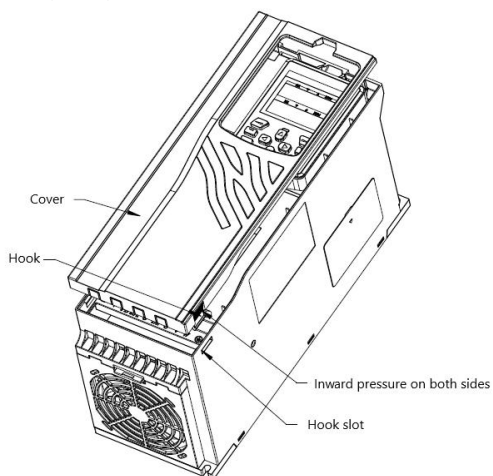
Schematic diagram of disassembly and assembly of the plastic shell cover
